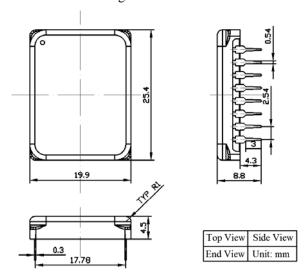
Dimensions of the DIP package controller of TEC5V6A-NT
